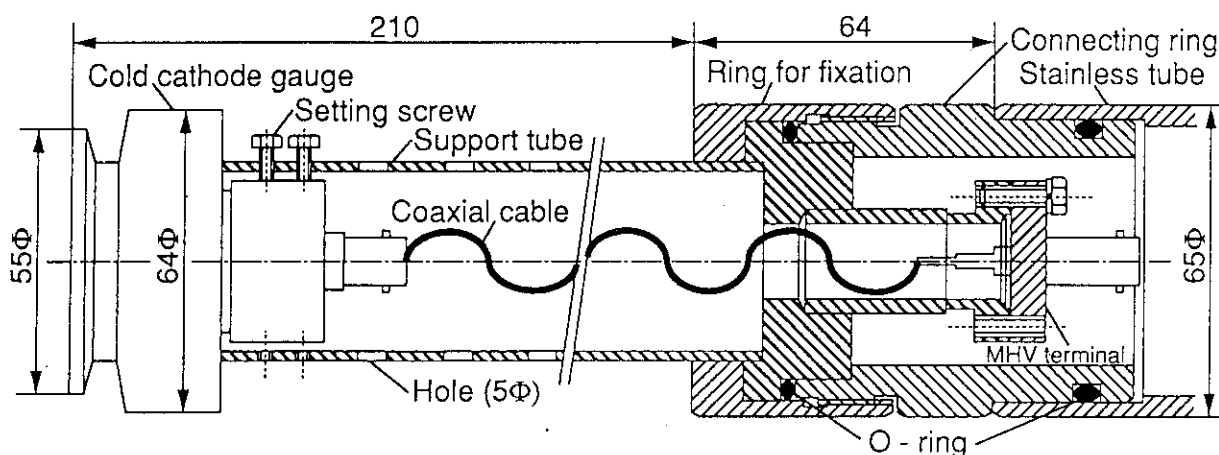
A drawing of the cold cathode gauge head mounted at the top of the main probe.
